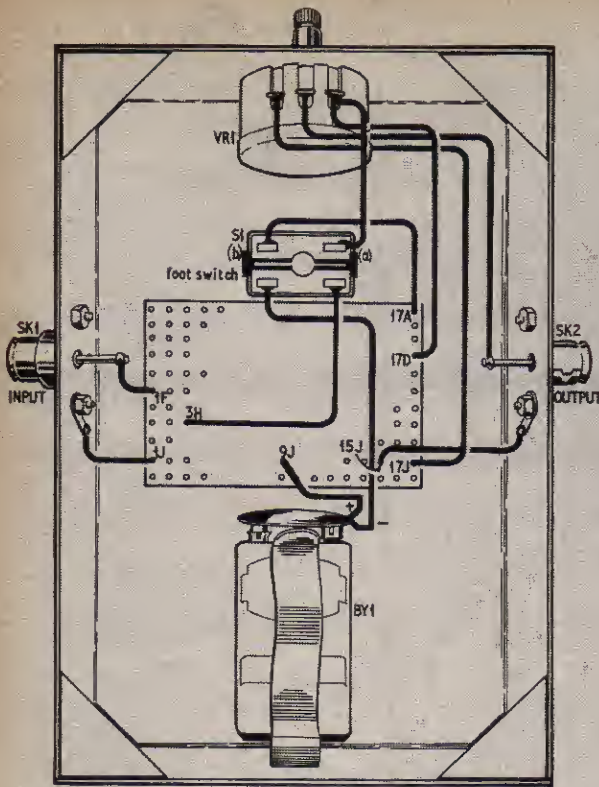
Wiring details of the unit. The full details of the centre component board are shown in Fig 2
